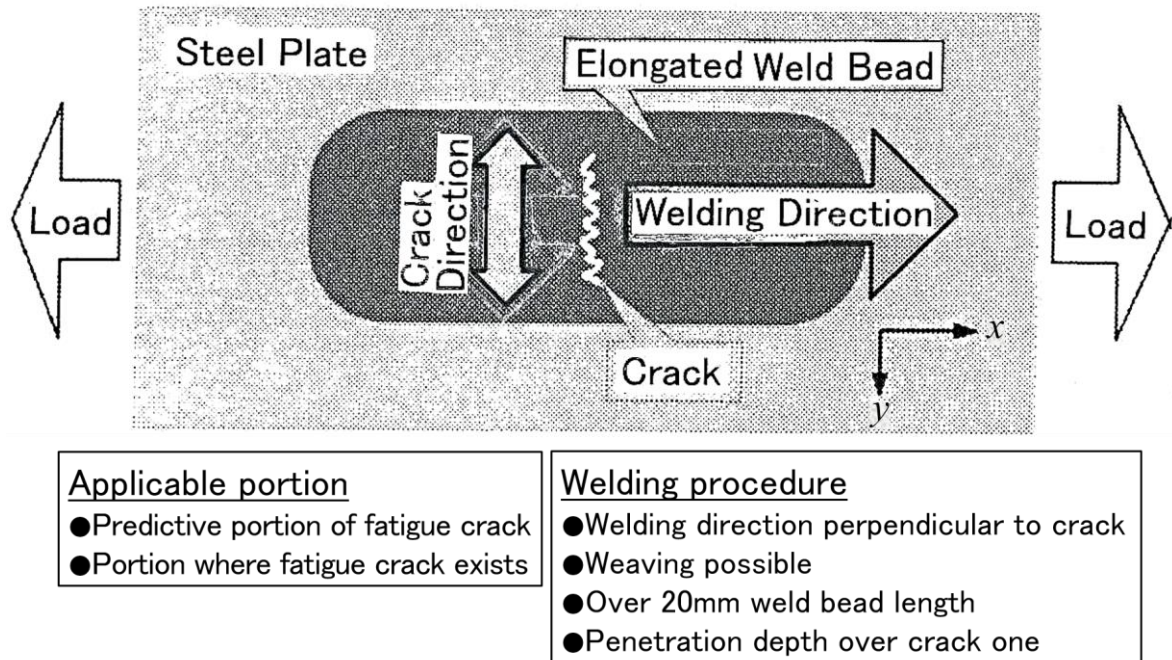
Schematic drawing representing the concept of elongated weld bead method, welding procedure and applicable portion
